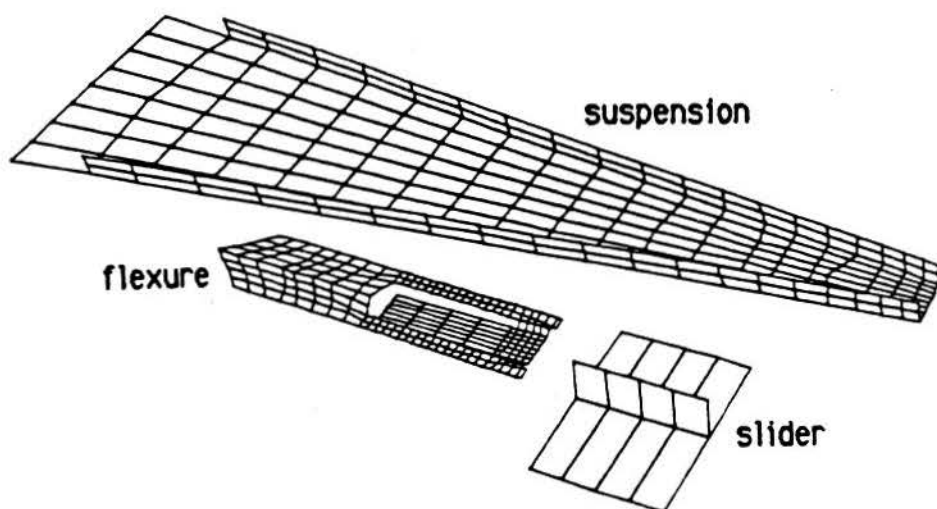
Disc Drive Head Finite Element Mesh (Exploded View)
